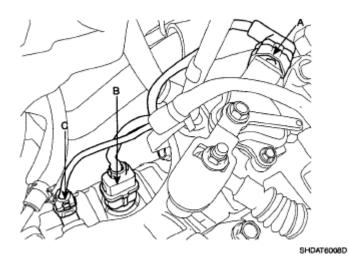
Identifying Inhibitor Switch Connector, Solenoid Valve Connector And Input Shaft Speed Sensor Connector
